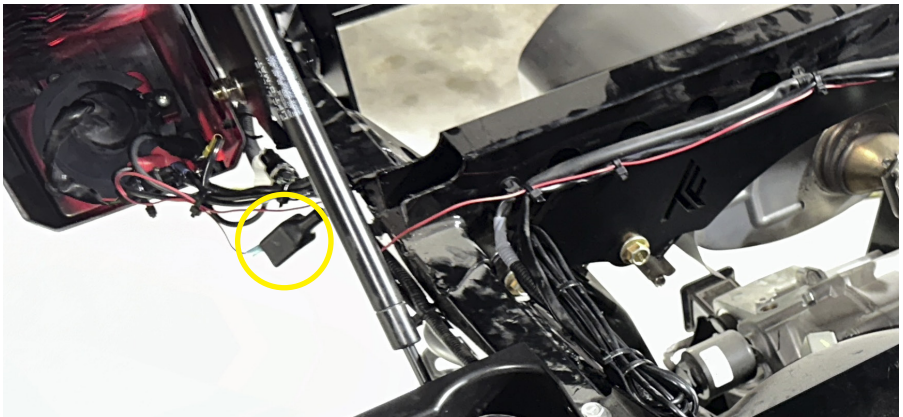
Plug in Red wire to Key On Power after crimping on Bullet Connector
